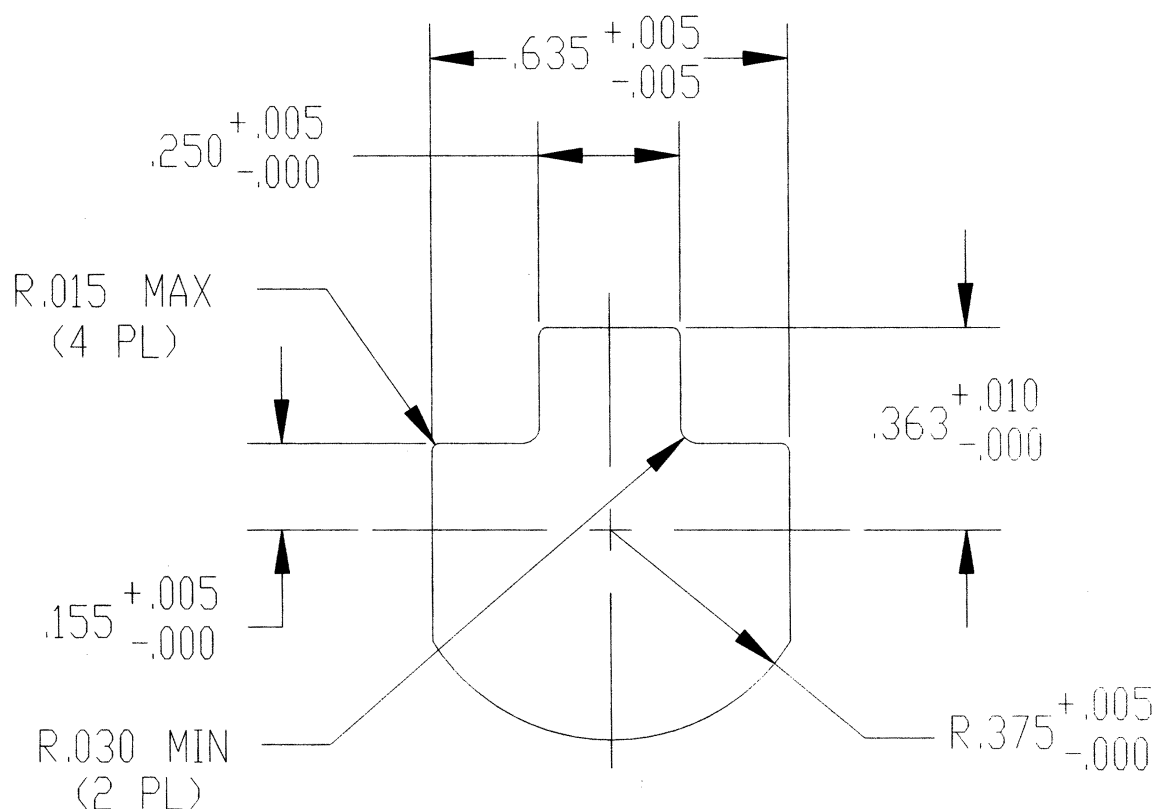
Mounting Hole, PSIN 0910 Customer Lock
